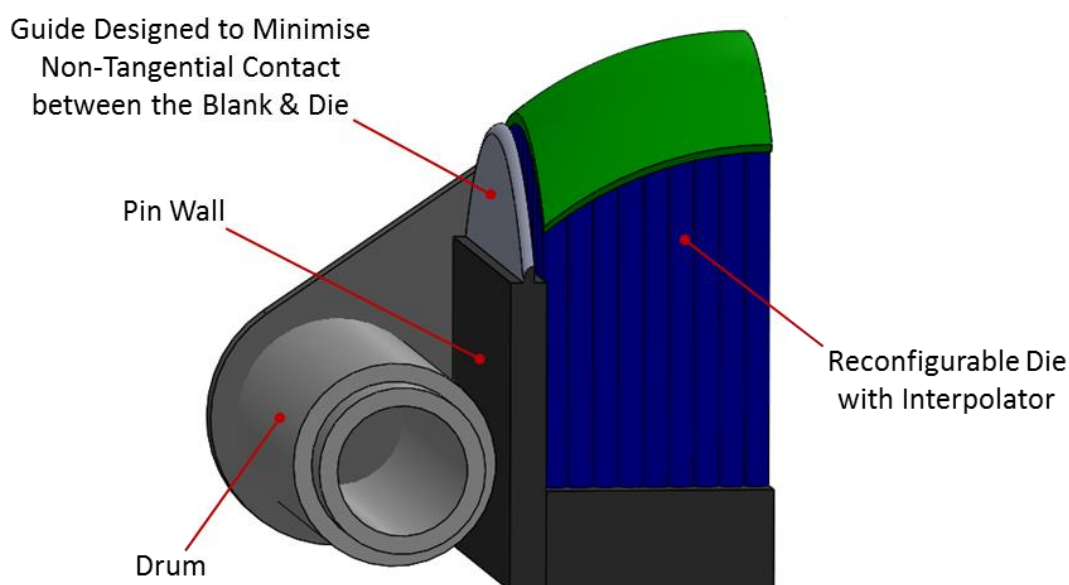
Guide fitted to the industrial scale machine to minimise non-tangential contact between the blank and die
